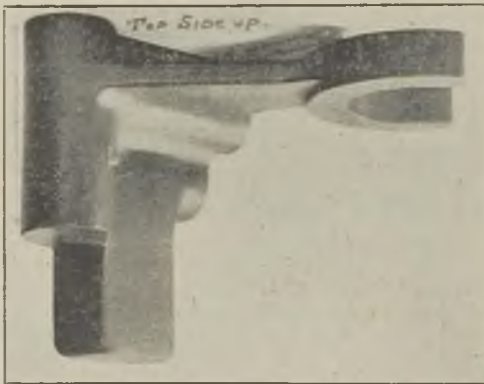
MOTOR GEAR BOX STRIKING FORK CASTING.
